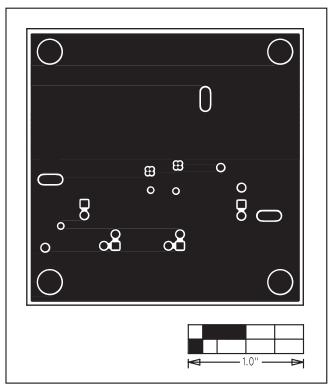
MAX17083 EV Kit PCB Layout—PGND Layer 3
